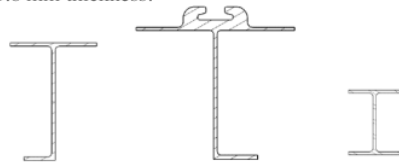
Cross-section of Floor Beam, Seat Track, and Stanchion, respectively (not in scale)
